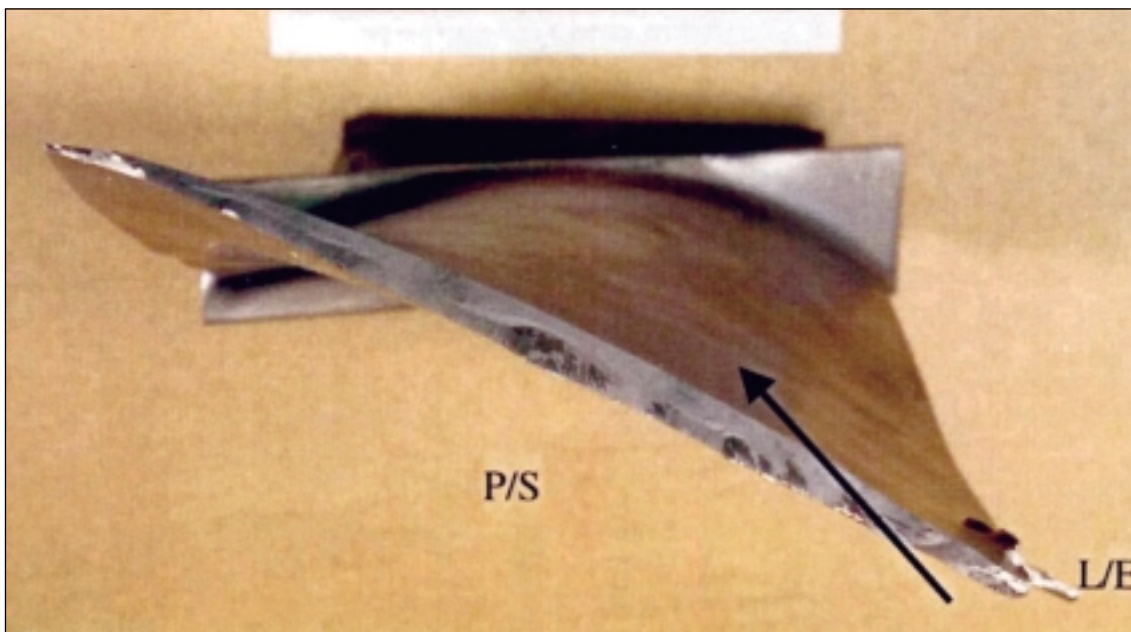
Inner airfoil fracture surface of fan blade 11
